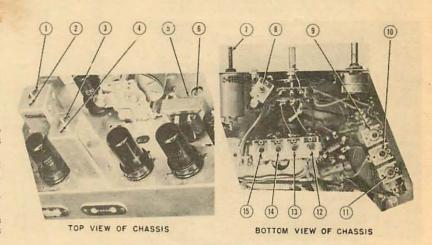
Top and bottom views of the receiver locating slugs, padders and trimmers for alignment purposes.
